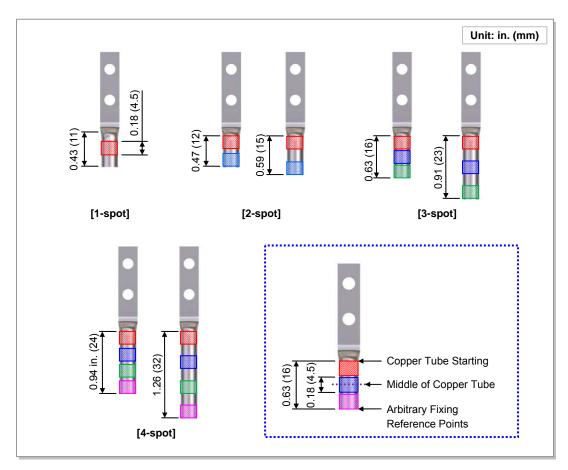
Pressure Reference Drawing (Handheld Compressor)
